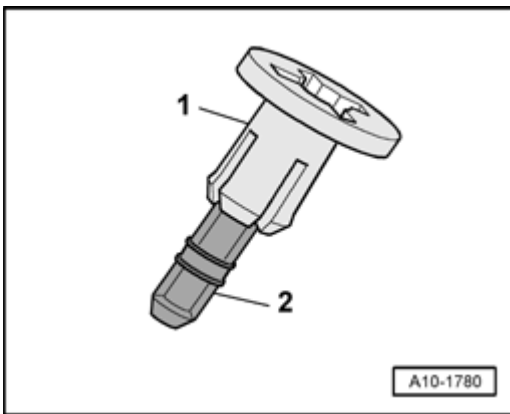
Identifying Fasteners At Lock Carrier & Pin
